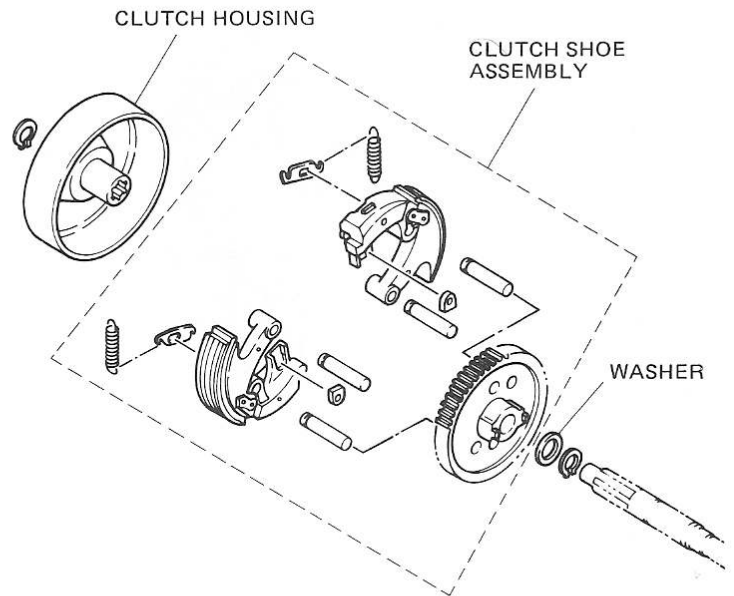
A.11 YZ 60 clutch components — exploded view (Sec 12)
